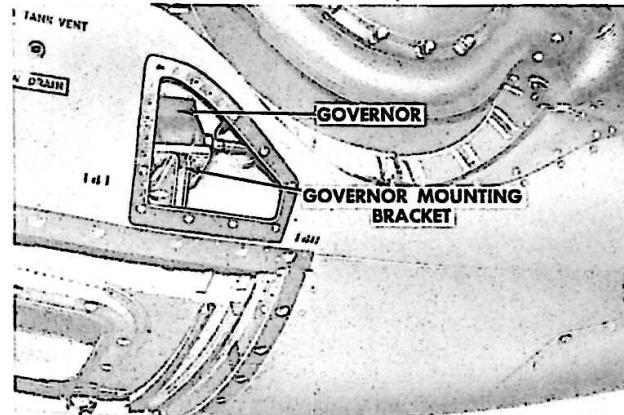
Governor Mounting, Outboard Engines of B-29 Airplanes
